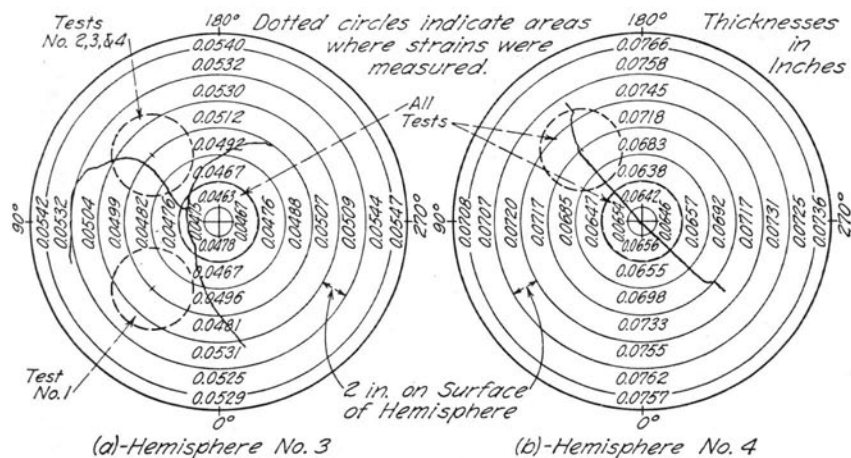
THICKNESS OF SPECIMENS 3 AND 4 AFTER FAILURE
